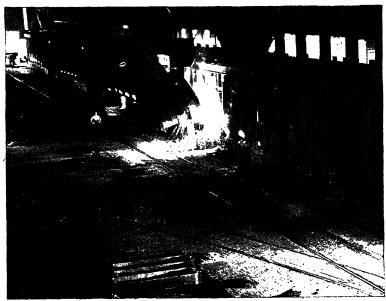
Charging hot metal into an open-hearth furnace. The furnace doors are operated by remote control, and a movable trough lined with refractory is placed before the door. (Bethlehem Steel Co.)
